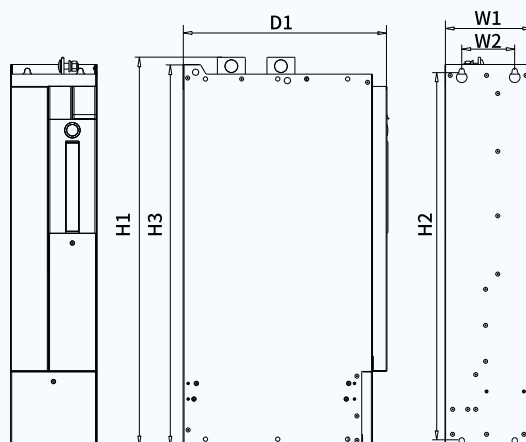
Wall mounting drawing for the 380V 355kW rectifier unit
